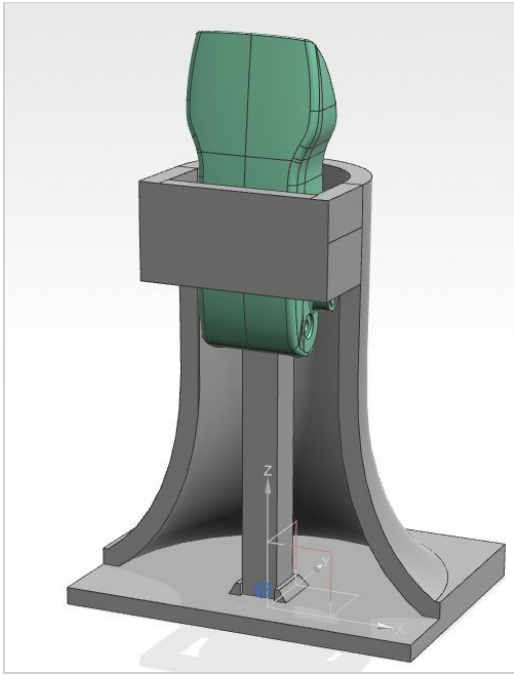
A holding fixture that seats a part for inspection.
